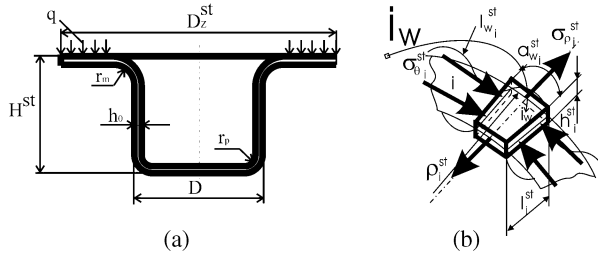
Scheme of the blank forming by deep drawing (a) with a blank flange element (b)
